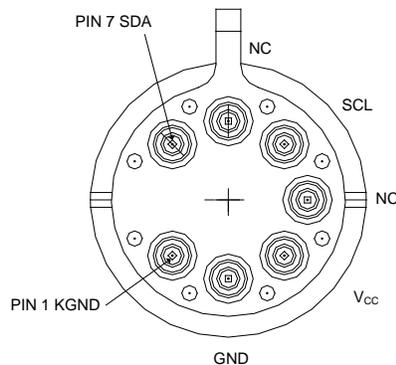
shows the KSD board-mount receptacle. Refer to spec sheet for dimensions.
